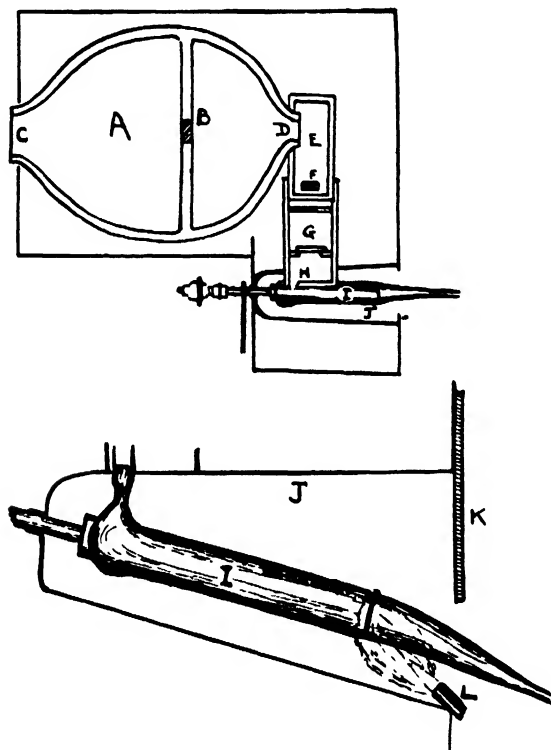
THE DANNER TUBE-DRAWING MACHINE.
